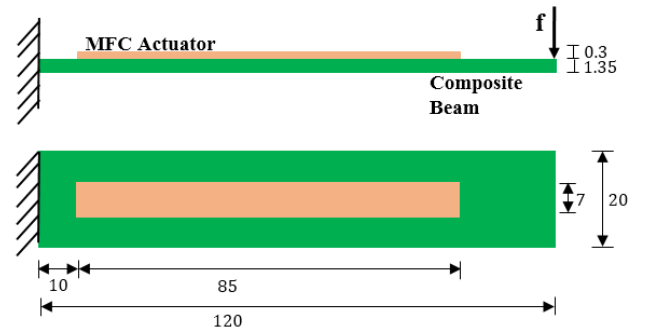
View of cantilever beam with bonded MFC-8507P2
